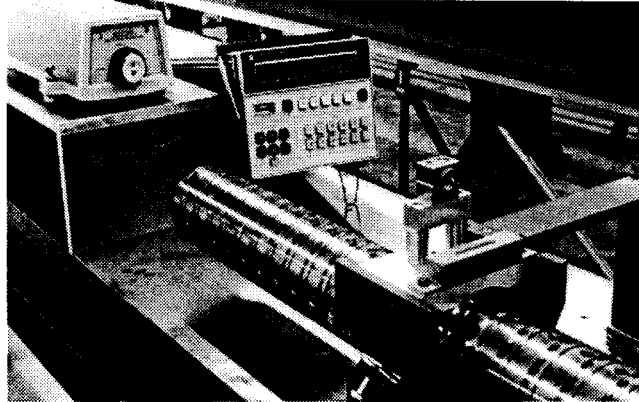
Laser Head with Measurement Display and sliding Carriage with Wollaston Prism
